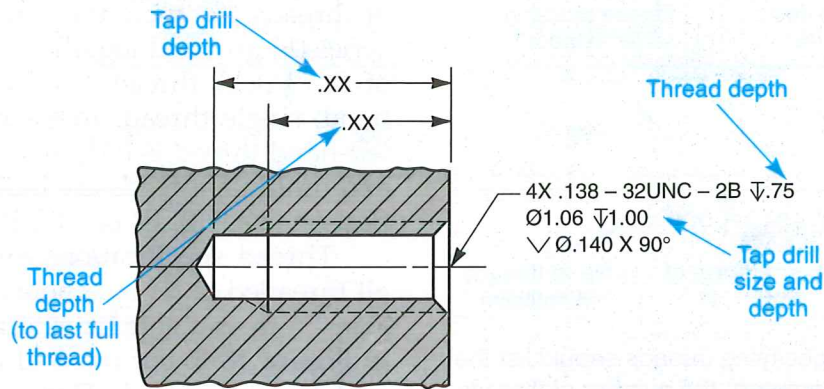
Thread notes may provide additional information such as the tap drill size, the drill depth, and the thread depth. (American Society of Mechanical Engineers)
